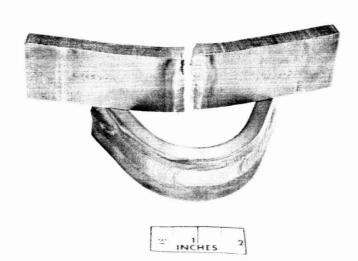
FS-85 and SCb-291 Plate Weld Bend Specimens
